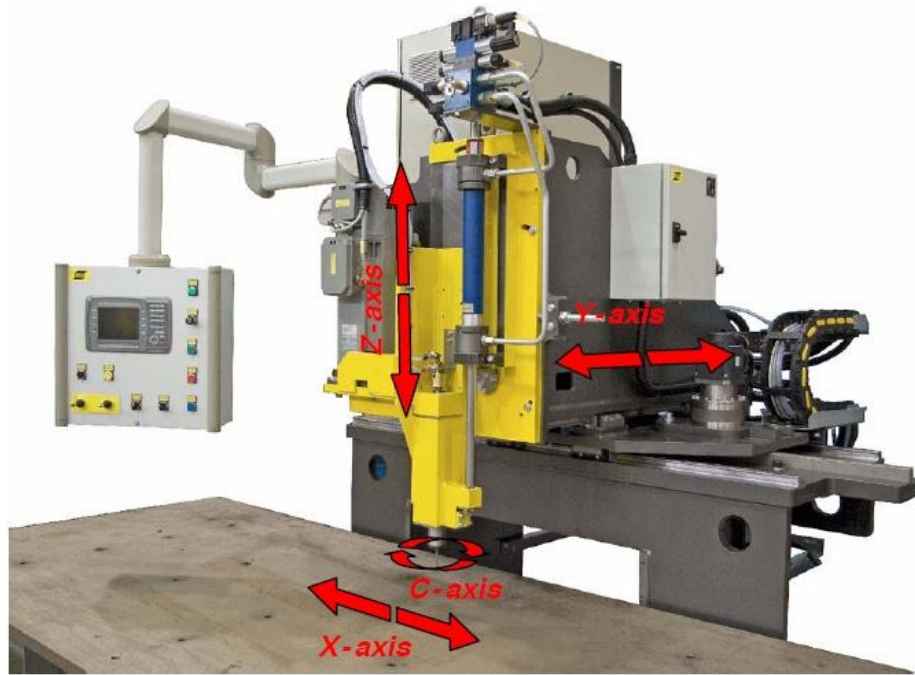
ESAB LEGIO™ 3UL friction stir welding machine. Degrees of freedom representation [76].
